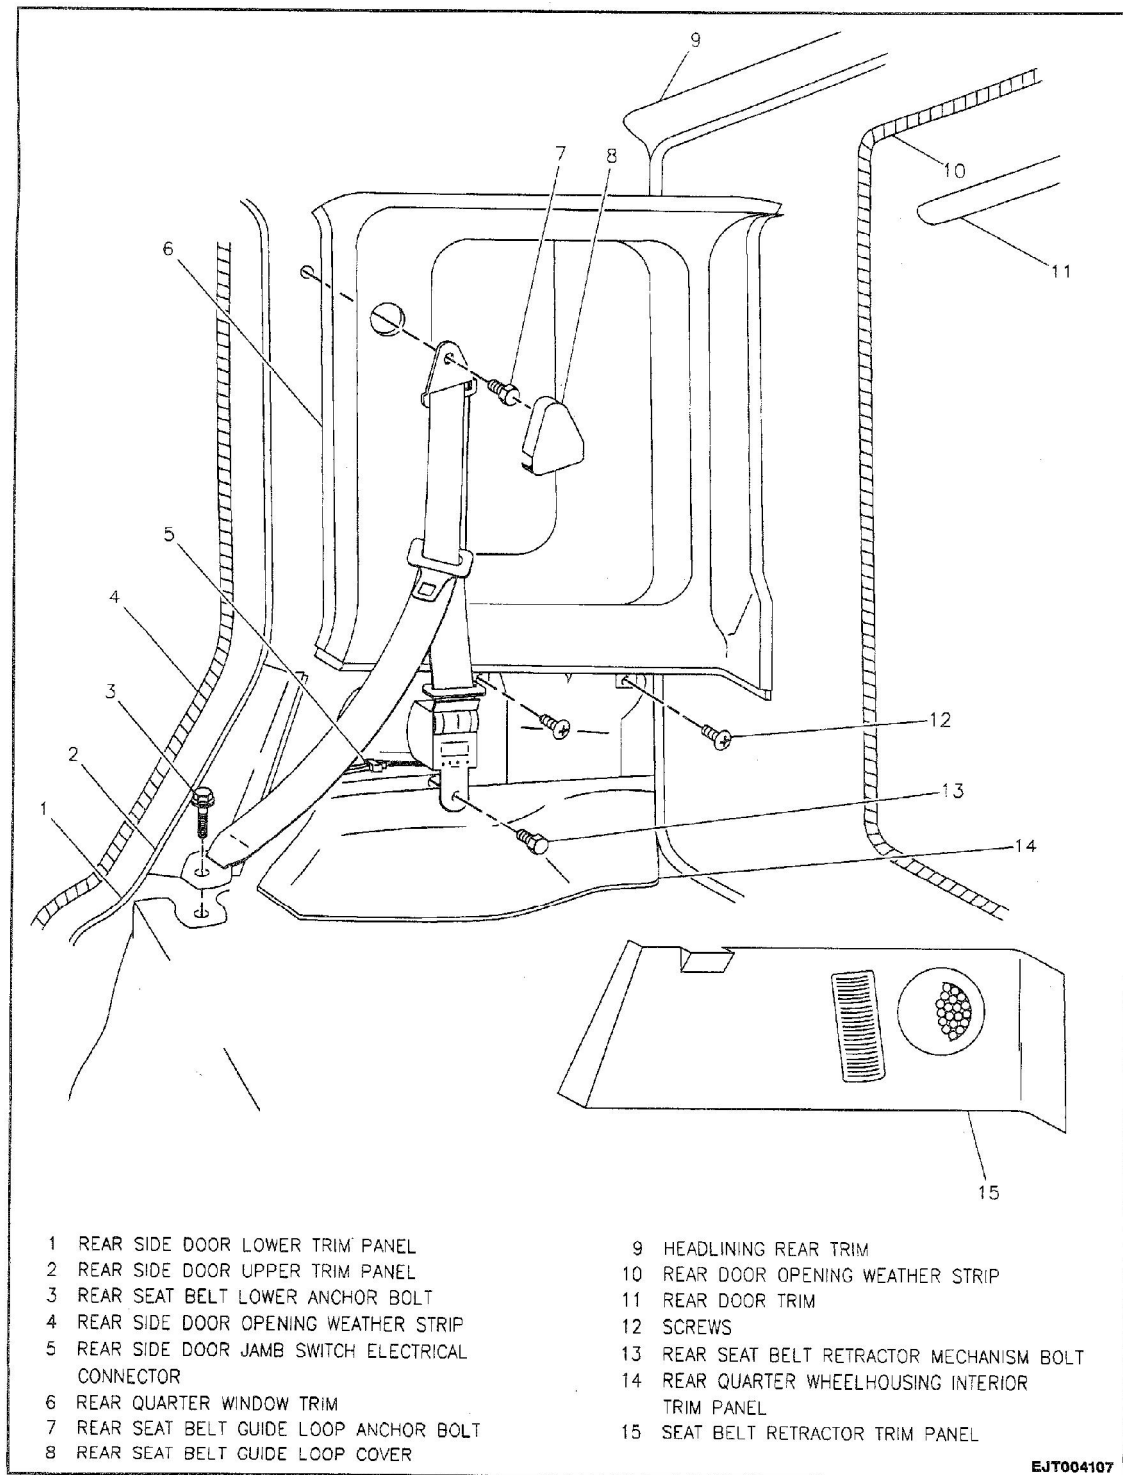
Rear Seat Retractor Trim Panel—Four - Door Models
